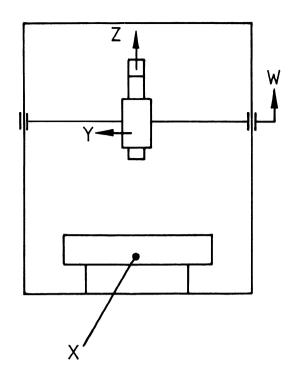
Type 3: Machine with one milling head on the cross-rail (standards.iteh.ai)
